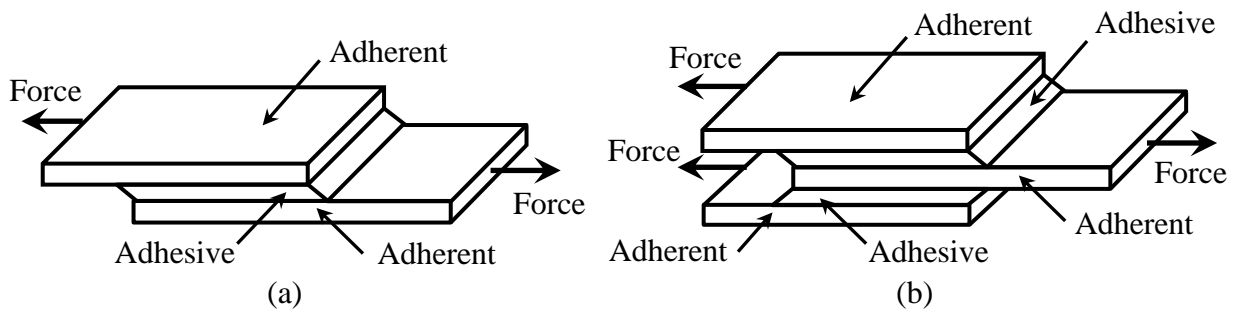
Adhesive joints: (a) single-lap joint, and (b) double-lap joint
